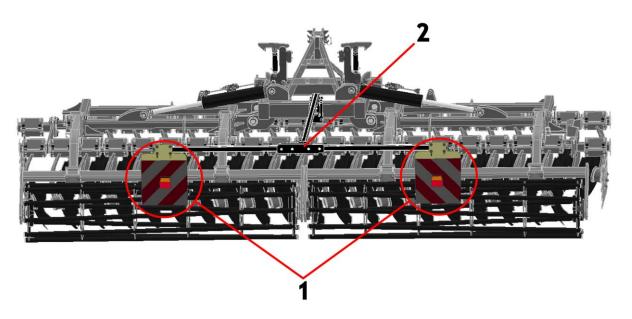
Illumination support assembly for the GAL-C H disc harrow (1 - illumination boards mounted on support, 2 - illumination support mounted on harrow structure)
